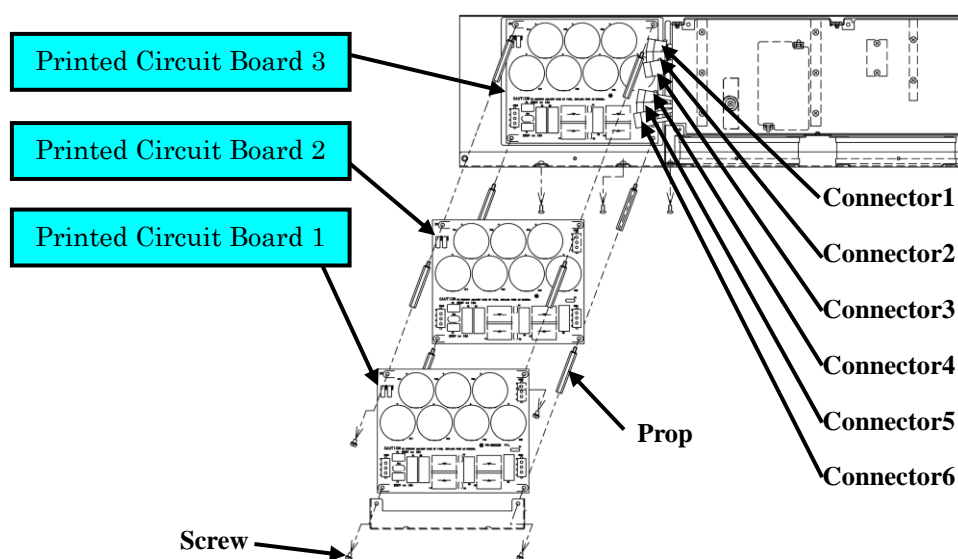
Remove PCB 1, 2, and 3 from the front of HS2960
